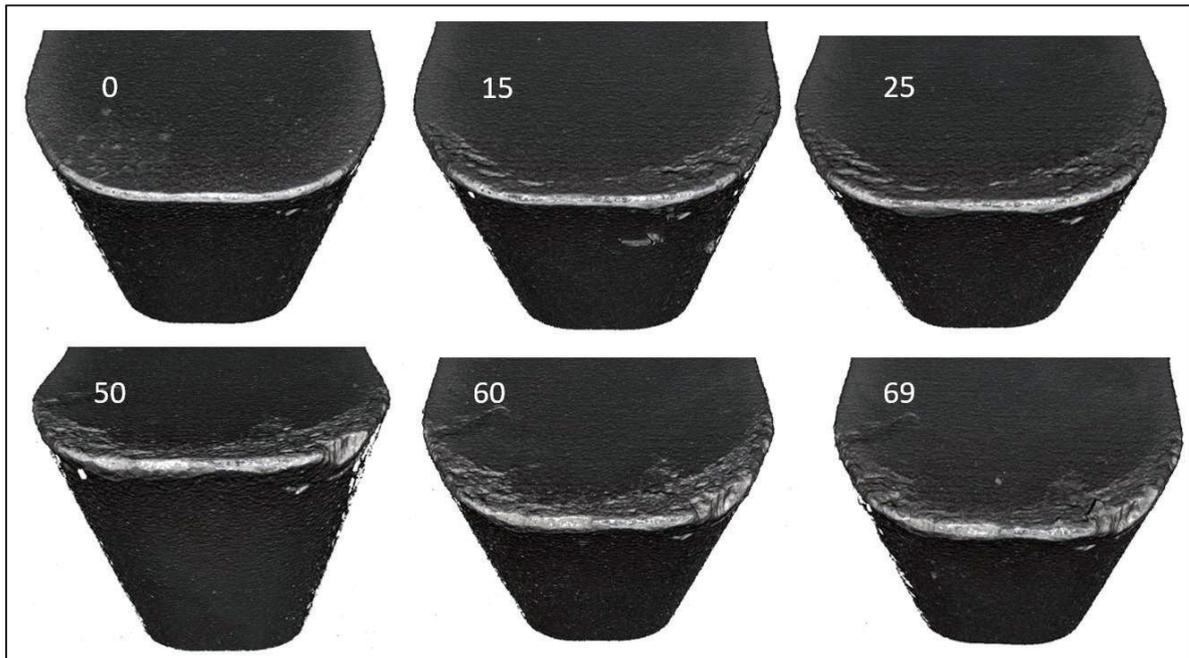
Typical appearance of ASP2062 tool with many small chippings
